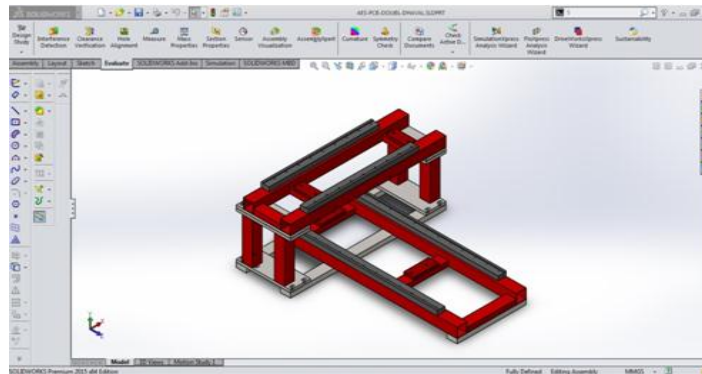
Isometric view of PCB Drill Mech SS 300 Structure
